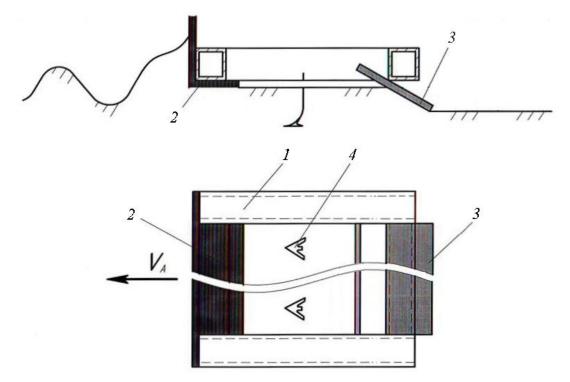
The working process of the developed grinding machine 1-frame 1; 2- leveller; 3-compressor; 4-component softener
